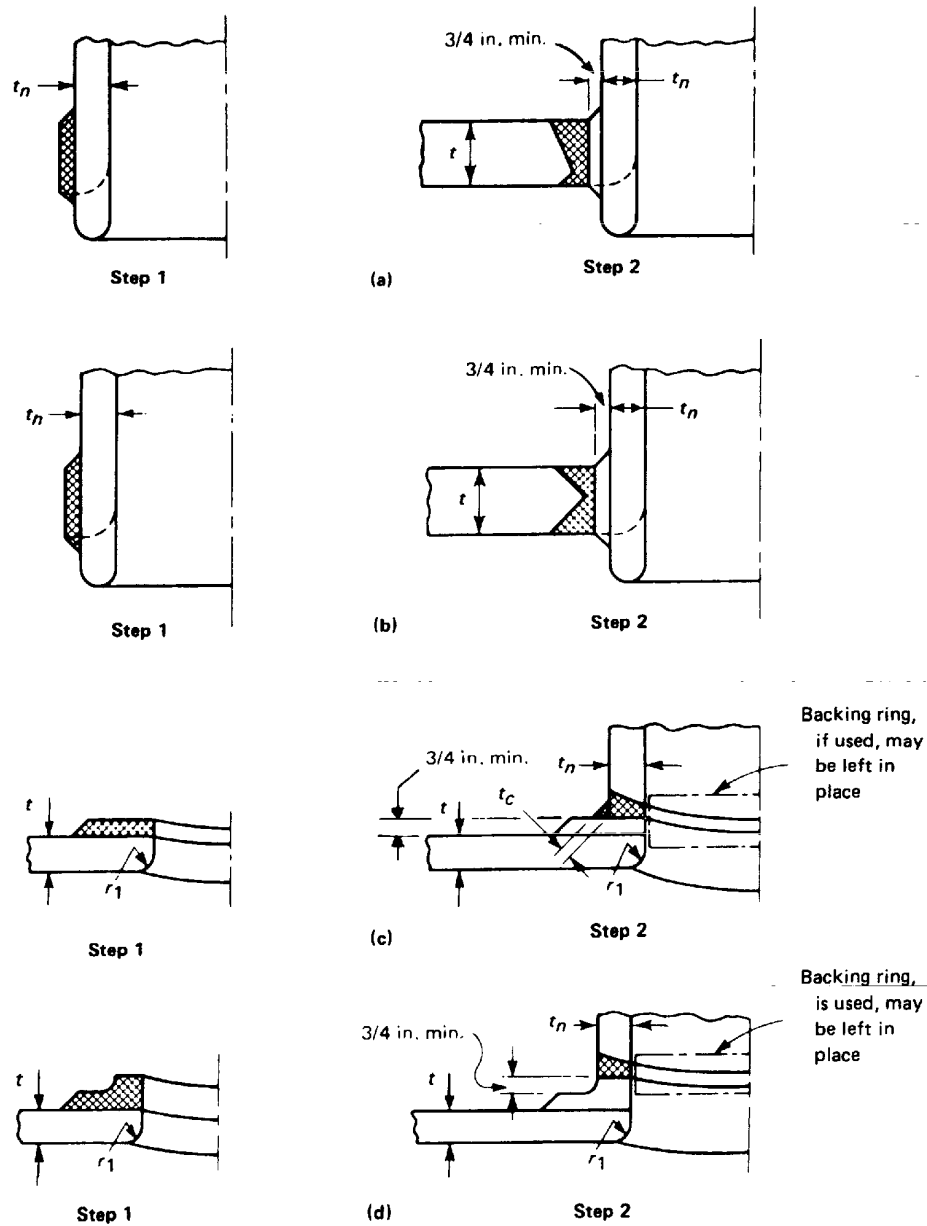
(c)-1 DEPOSITED WELD METAL USED AS REINFORCEMENT OF OPENINGS FOR NOZZLES, AND BRANCH AND PIPING CONNECTIONS
